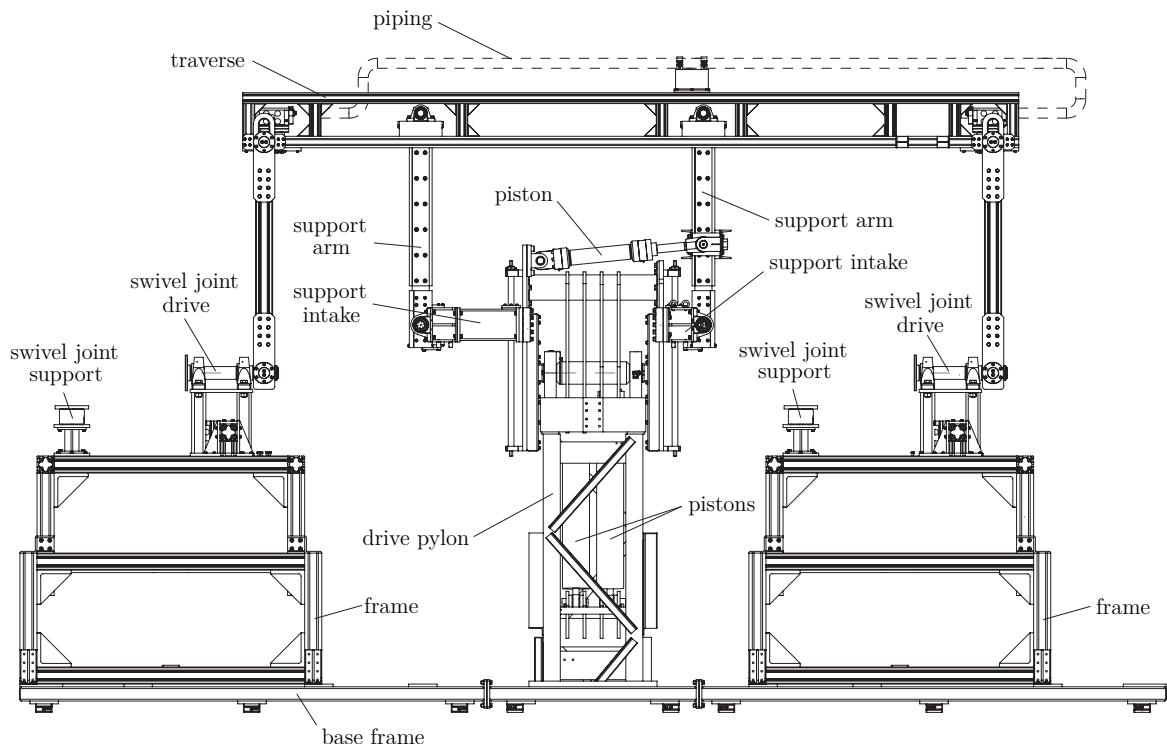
Technical drawing of the Kinematics Unit (configuration for testing RFHA)
